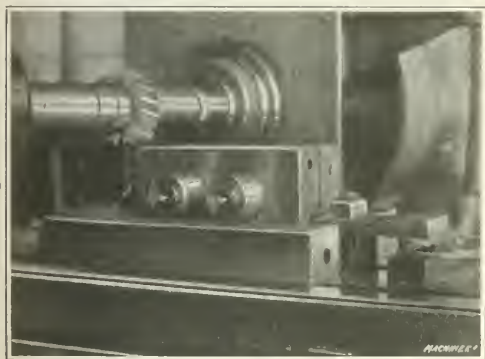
Milling Blocks to bring Sides Parallel and Holes Central
